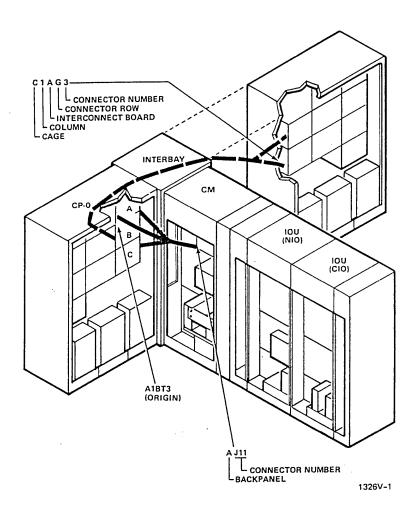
CP-0 and CP-1 Long and Short Warning Cable Connections to CM
